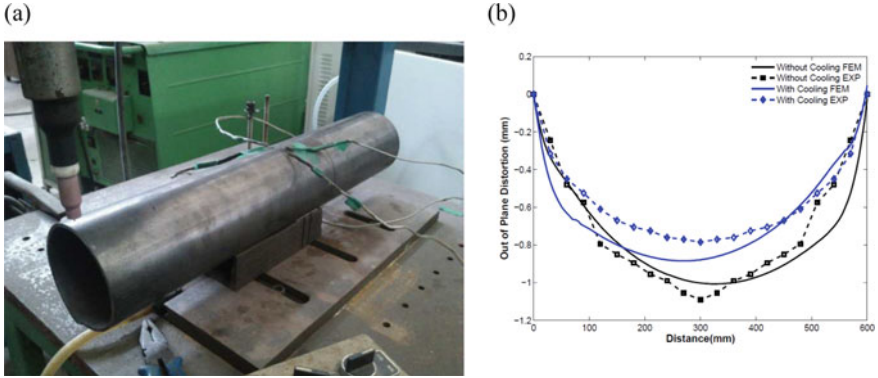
a Welding of cylindrical pipe with thermocouple measurements b Distortion along the axial direction of the pipe with and without cooling by a trailing heat sink [55]
